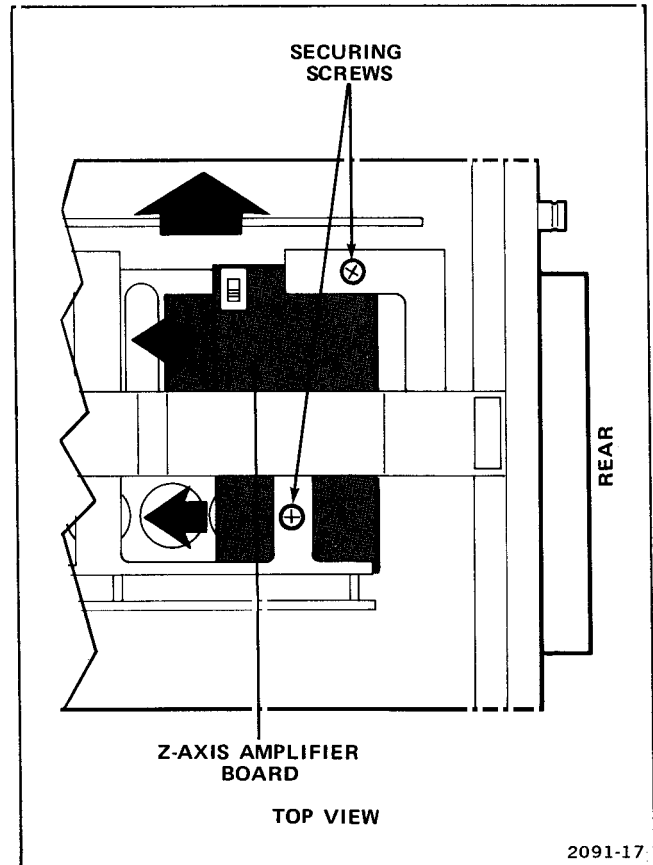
A2—Z-Axis Amplifier board removal and replacement.
